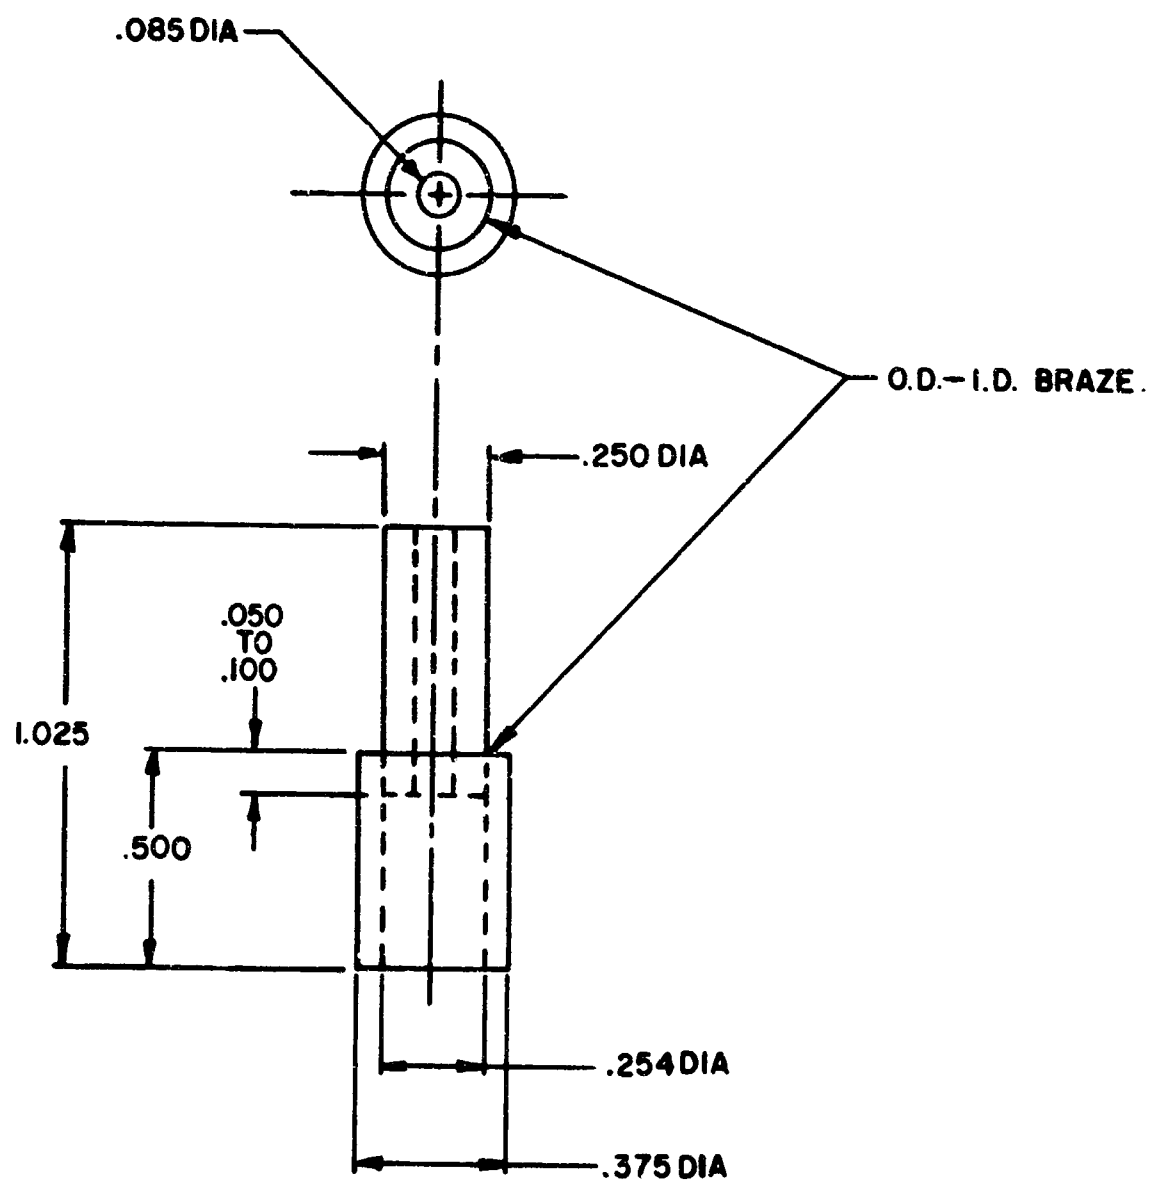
Shear test assembly consisting of two cylinders joined with an O.D.- I.D. braze.
